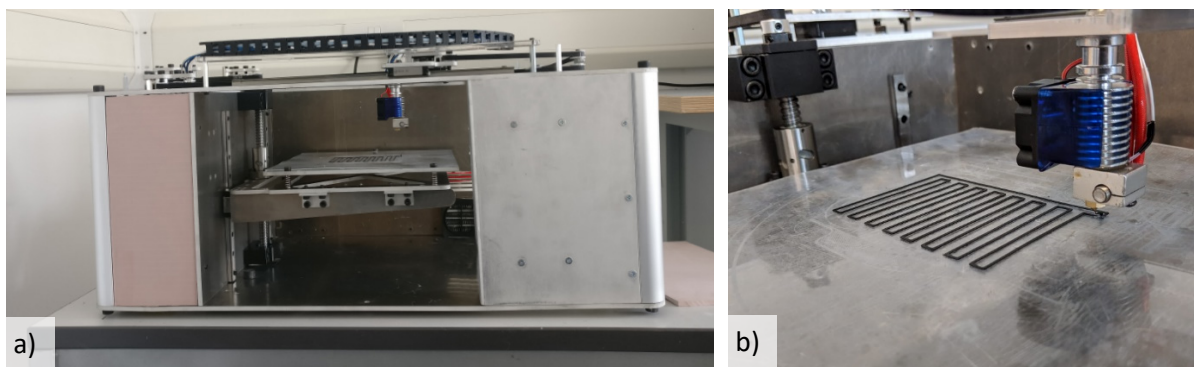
Images of the in-house 3D printer used to manufacture the samples: a) Front view of the 3D printer, b) A deposited sample of a conductive track
